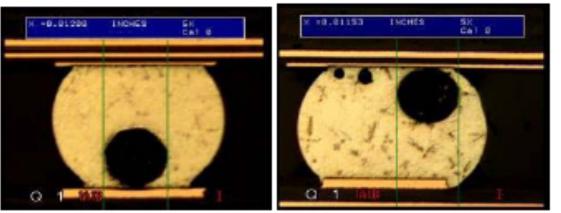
Examples of Process Macrovoids in BGA Solder Joints
